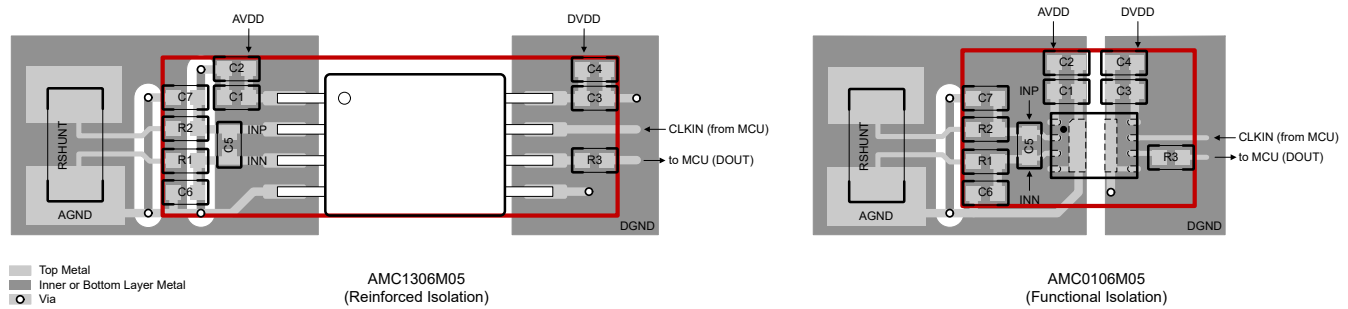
The AMC0106M05 reduces PCB solution size by 50%
